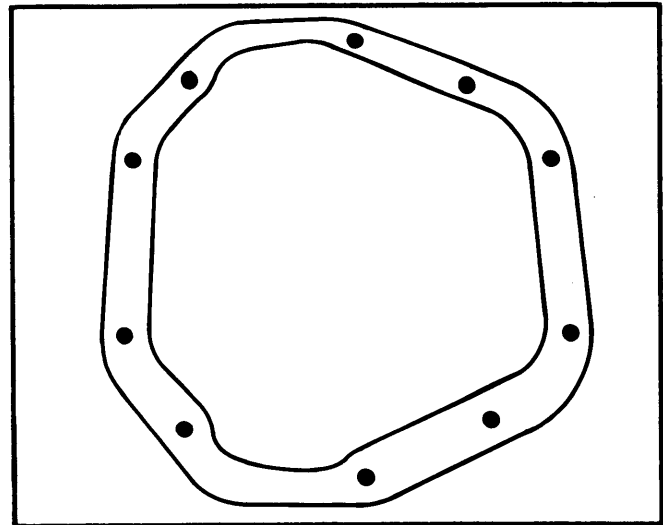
Spicer (Dana) Housing Cover Gasket for Identification Purposes
